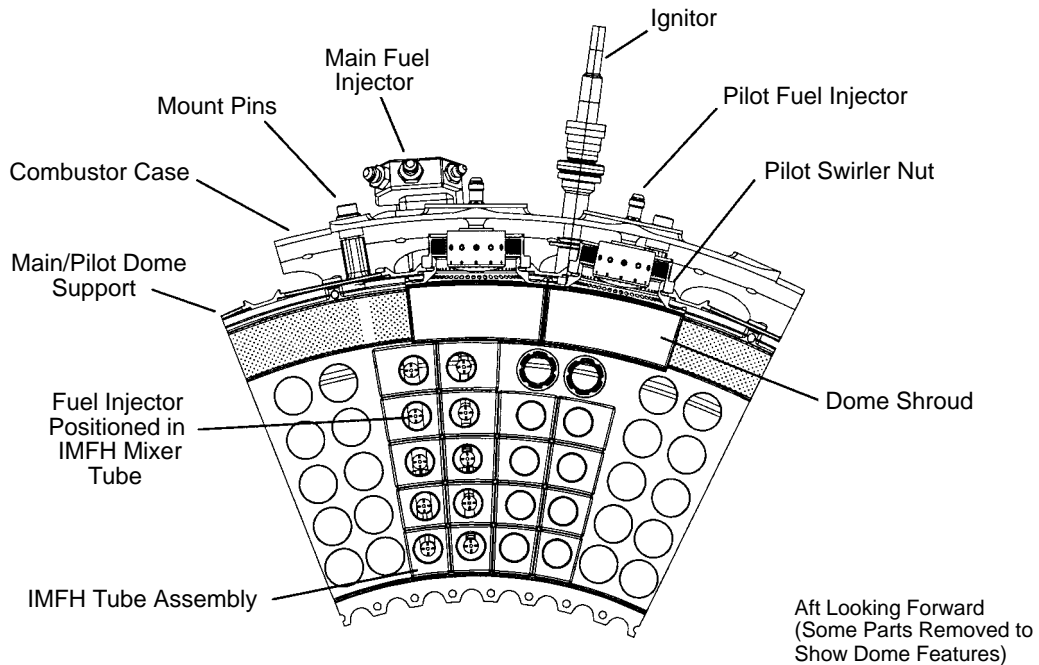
Full-Scale LPP MRA Combustor Preliminary Design – End View Aft Looking Forward
